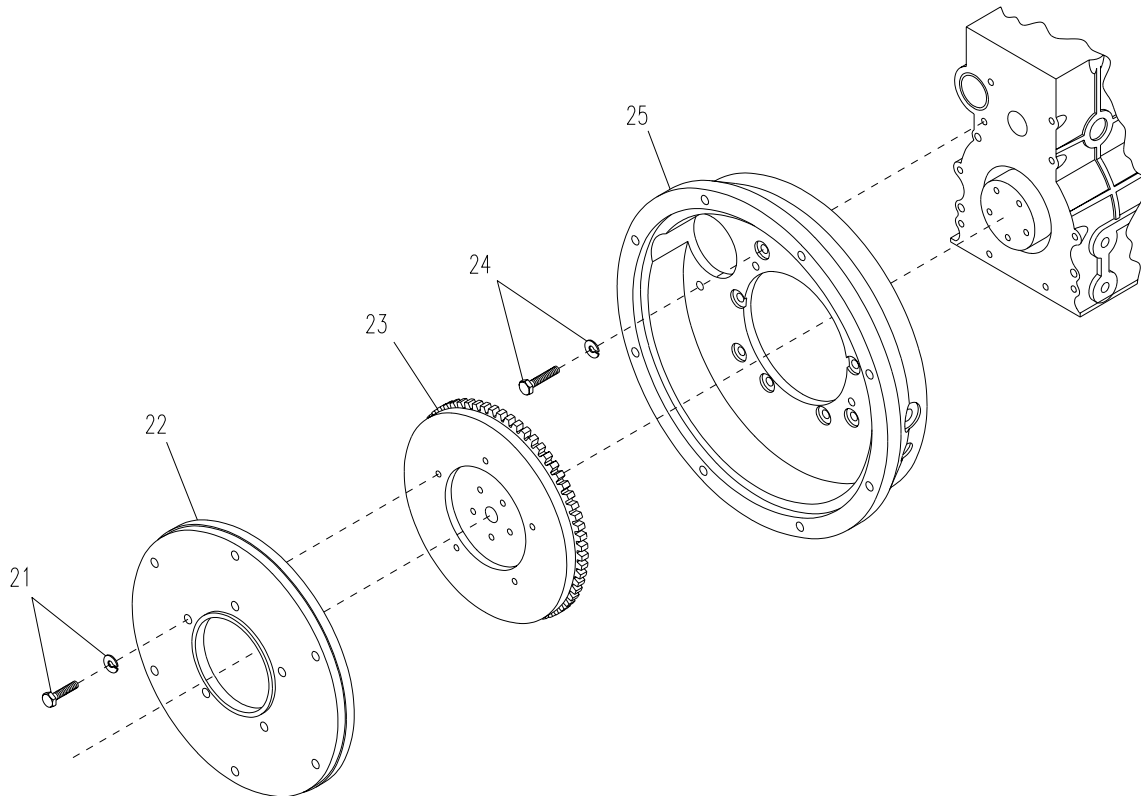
Diesel Engine (Sheet 8 of 11)
